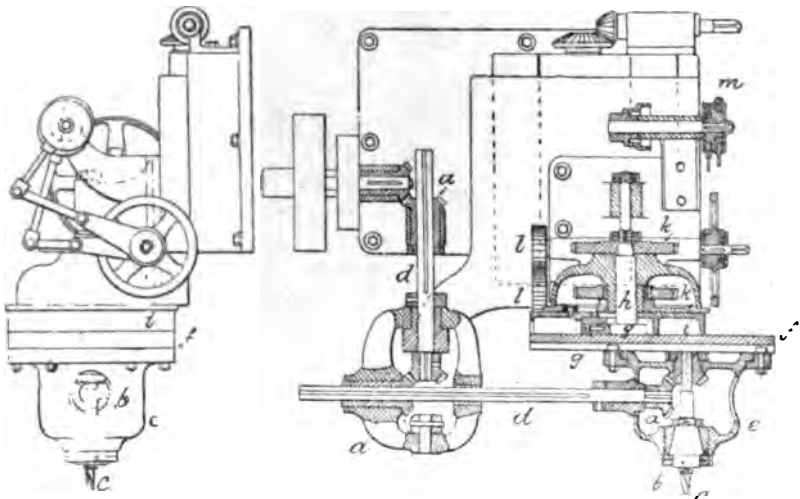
Milling Machine for Cutting Elliptical or Round Holes in Boiler Plates.
